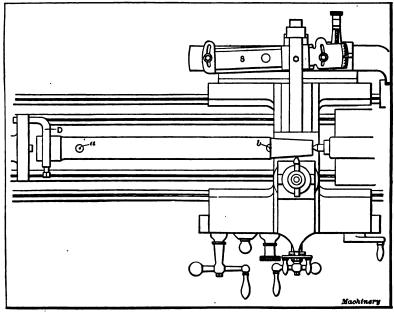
Taper Attachment Set for Turning Taper End of Rod
